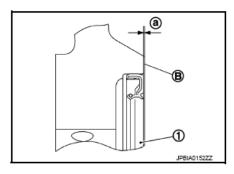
Identifying Oil Seal Applying Area On Cylinder Block Rear End Face Courtesy of NISSAN NORTH AMERICA, INC.
